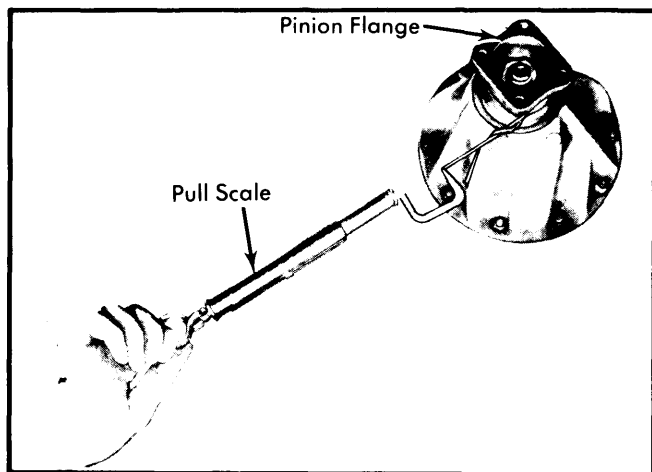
Using Pull Scale to Measure Drive Pinion Bearing Preload
